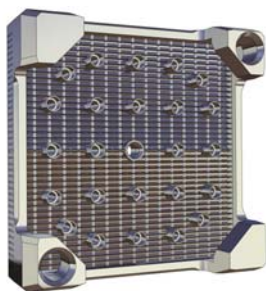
Robust FUELGUARD[™] bottom nozzle
